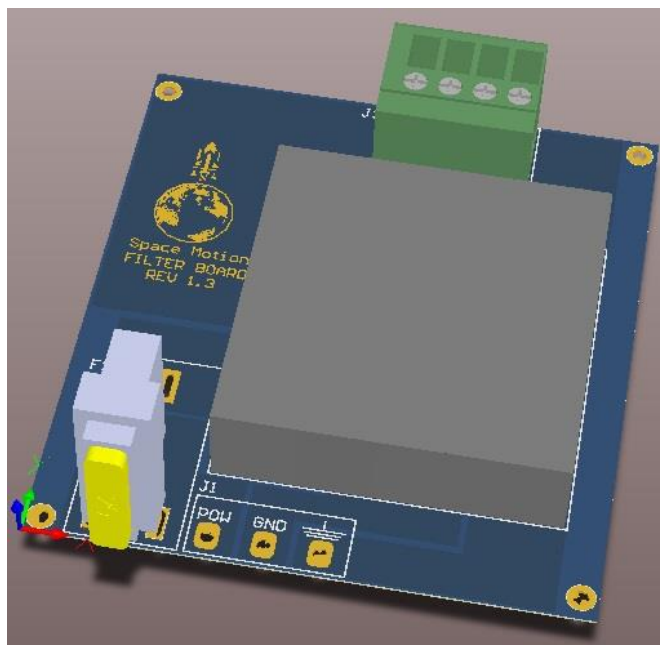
3D Model Side view of 1C601 Filter Board
